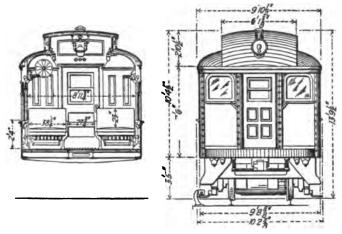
End View of All-Steel Motor Car Used on New York Central.
